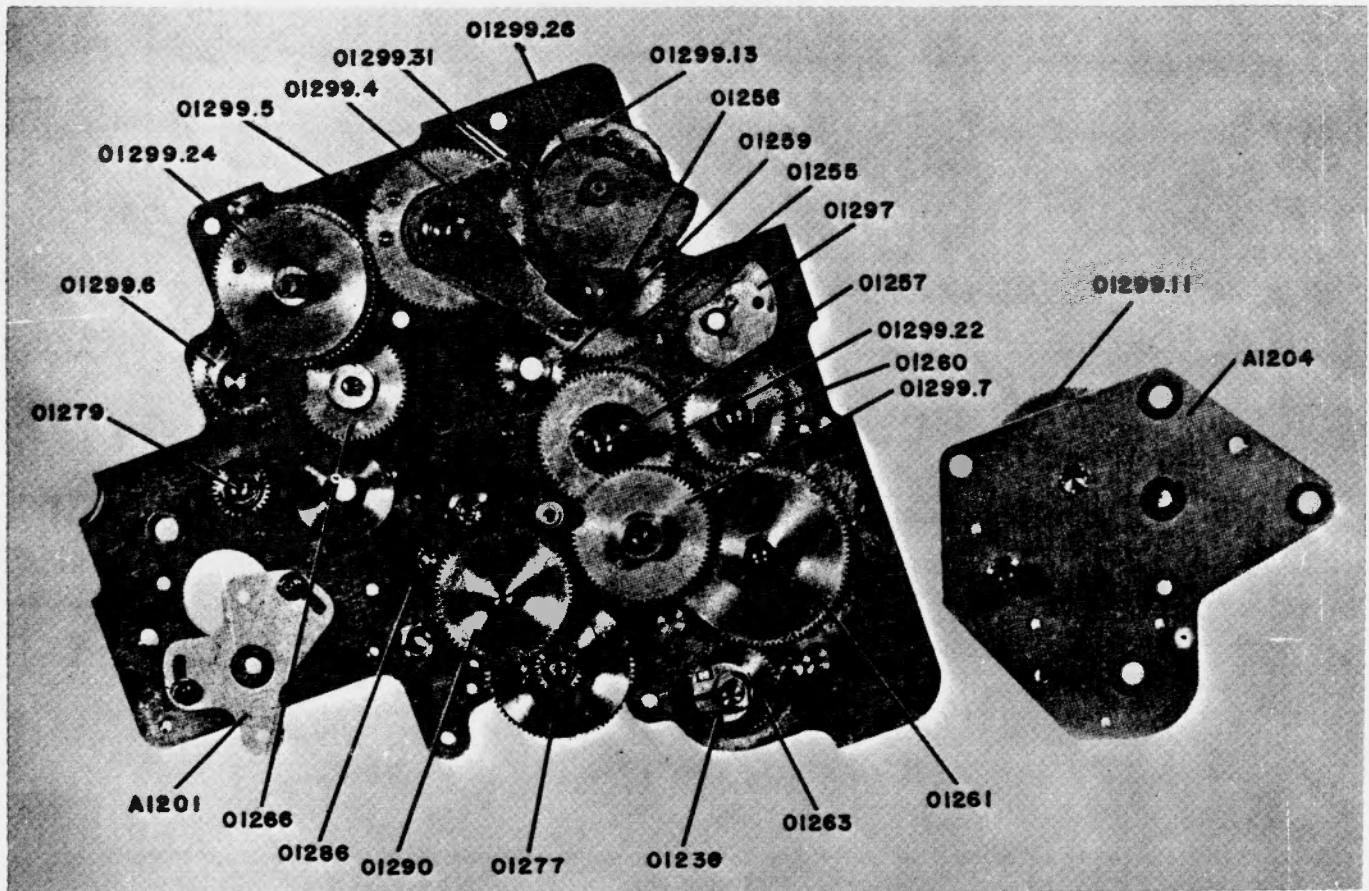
RT-581/URC-9, Frequency Selector, Front View of Rear Plate, Small Gear Removed
